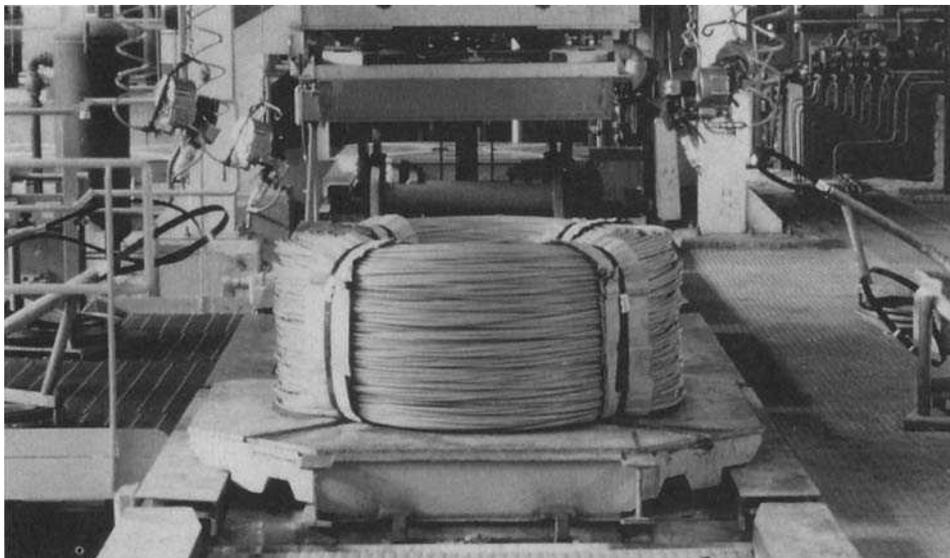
Copper wire rod—the principal intermediate product for wire manufacture
